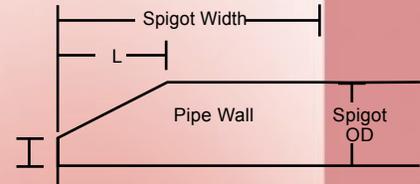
Pipe spigot and bevel dimensions definition for coupling joints
